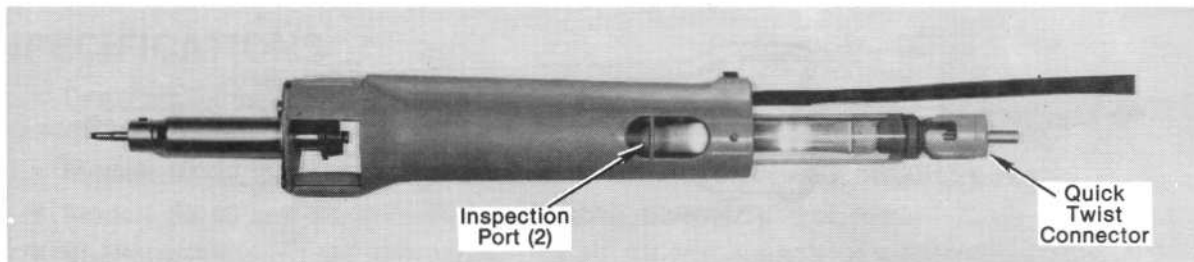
CUT-AWAY VIEW OF DUAL PATH SOLDER EXTRACTOR MODEL SX-25V
